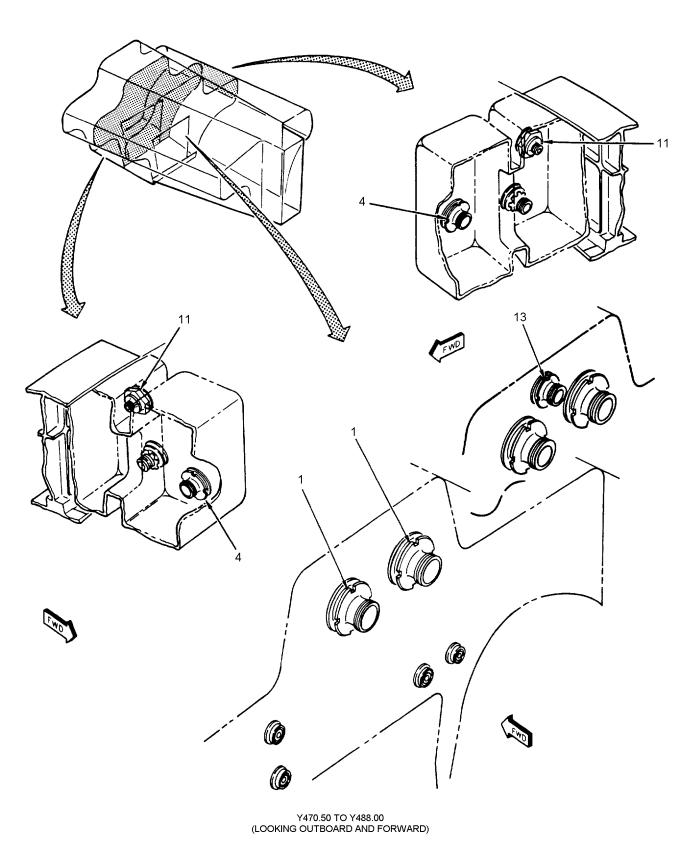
No. 4 Fuel Tank Retainers (Sheet 3)
